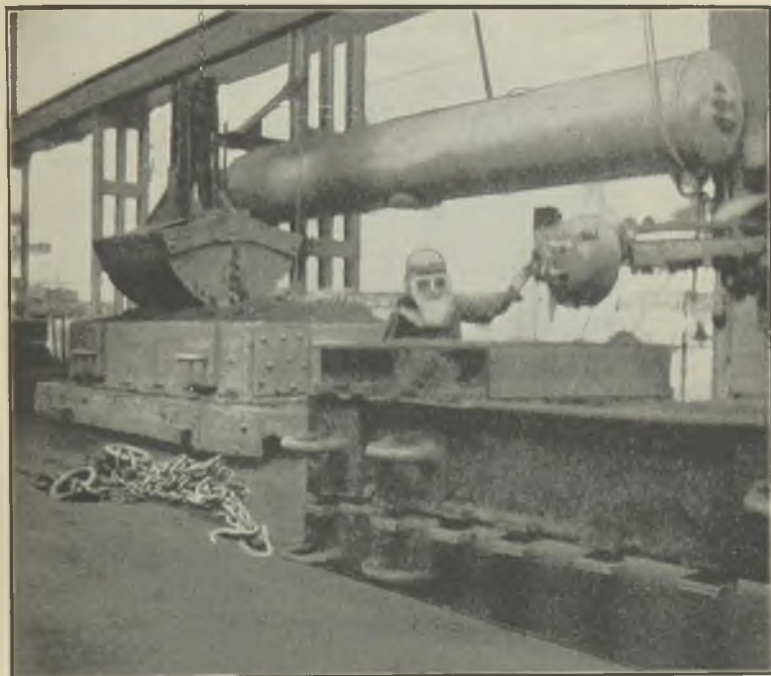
SHOCKLESS JARRING MACHINE AND SANDSLINGER.
